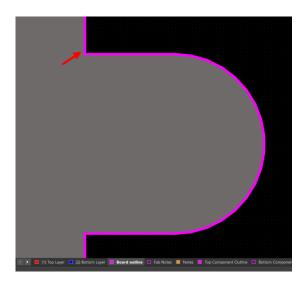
the PCB shape must be traced with lines so that you can generate gerber files that you can send to the PCB shape to the PCB manufacturer
